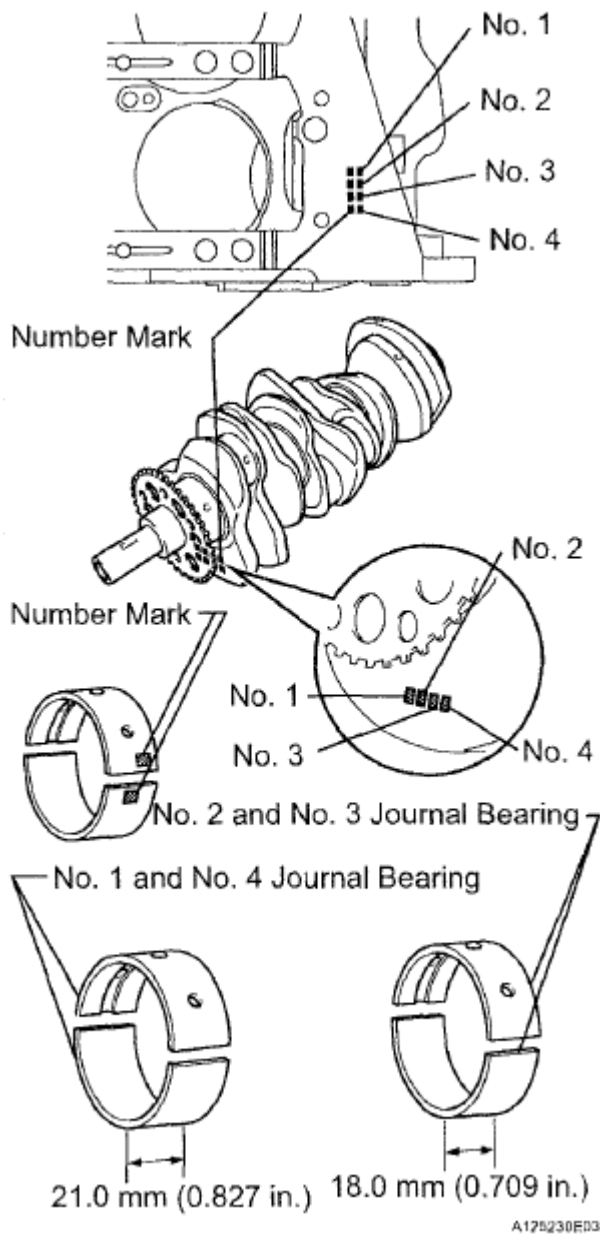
Identifying No.1 And No.4 Journal Bearing
